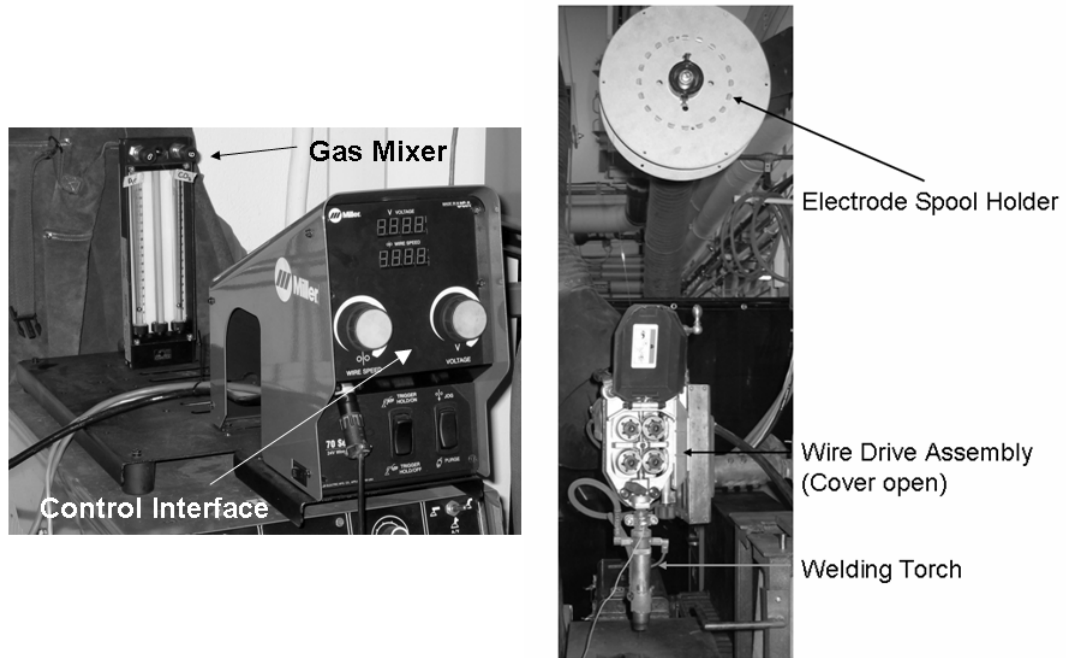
A detailed view of the modified wire feeding unit. The distance from the end drive rolls to the welding torch has been minimized to prevent buckling and allow smooth feeding of small diameter electrodes.
